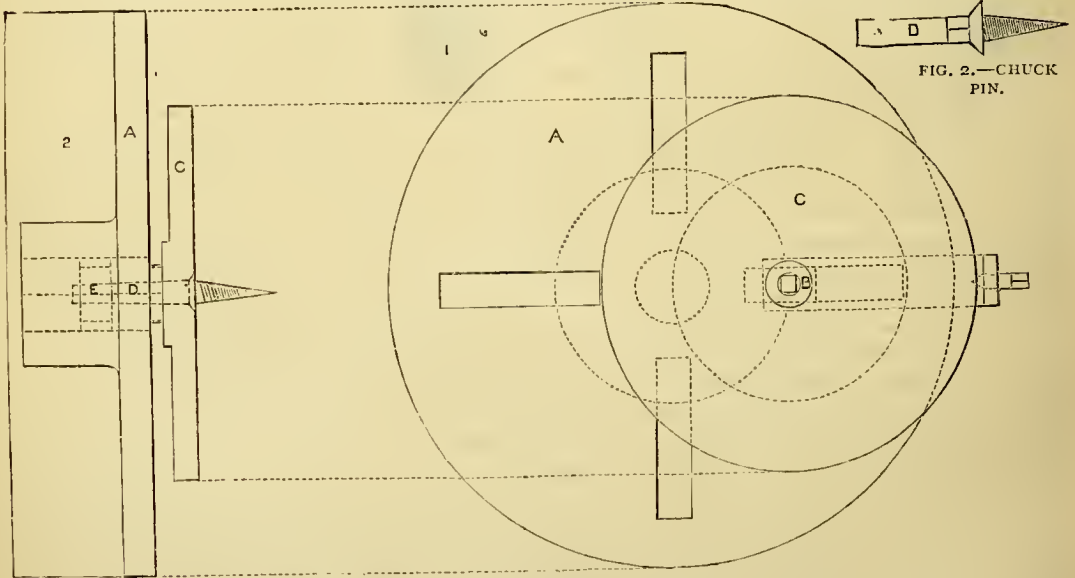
FACE-PLATE AND ECCENTRIC CHUCK. 1, Plan. 2, Section.
